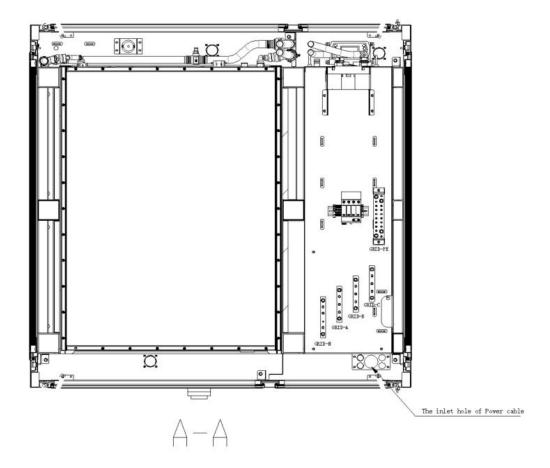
Layout of Power Cable Inlet Holes and Inlet Copper Rows
